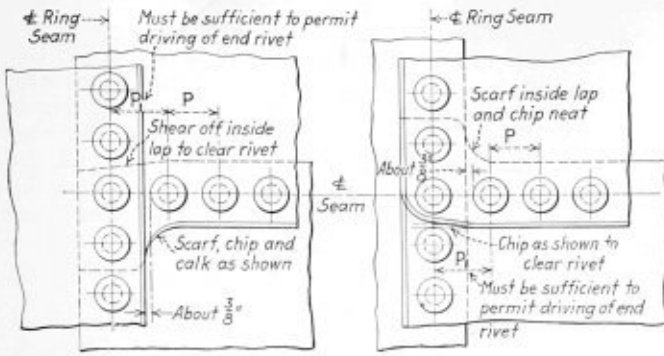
(a) and (b).—Inside and Outside Seam, End Construction for Single Riveted Lap Joint
